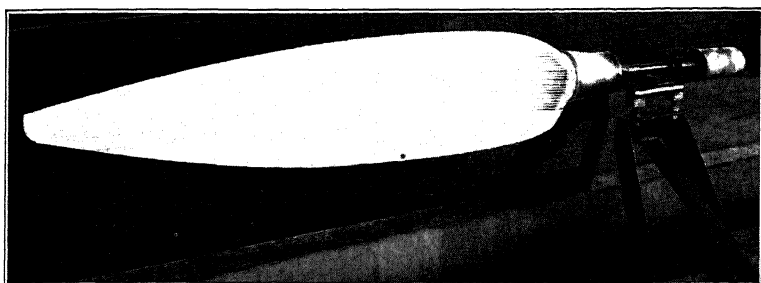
Blade balancing operation. (*Courtesy Engineering and Research Corp.*)
